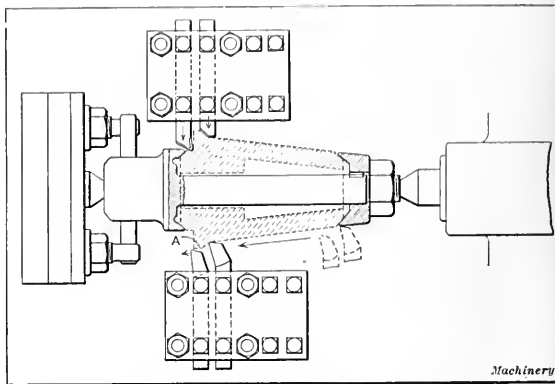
Method of holding Tapered Bushings shown in Fig. 7
